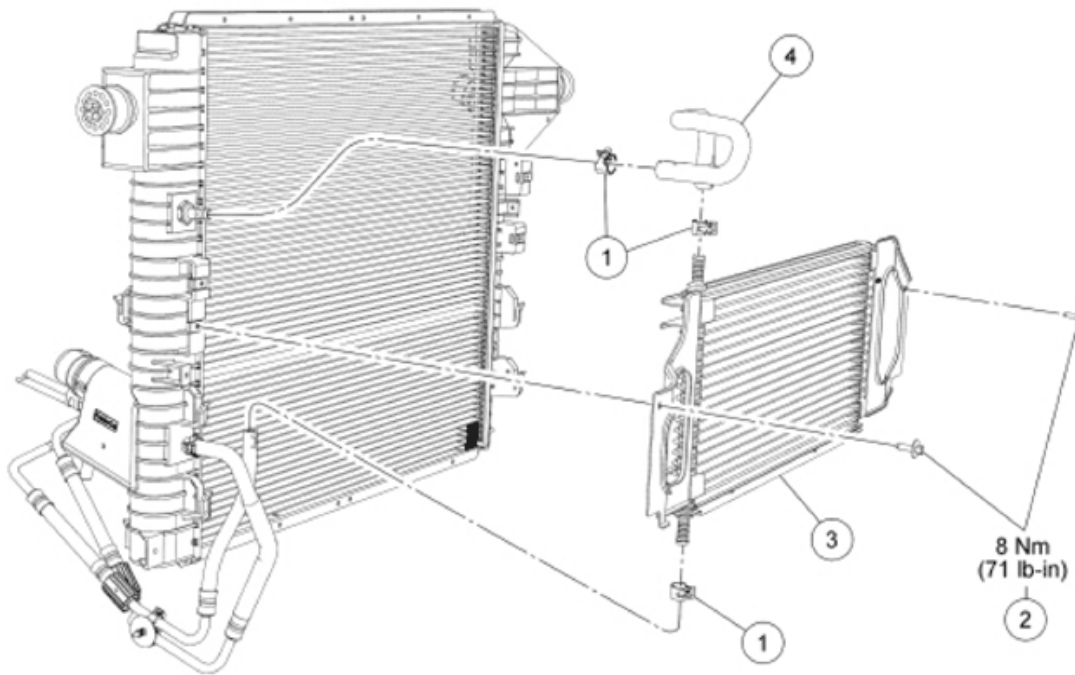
Identifying Auxiliary Transmission Fluid Cooler - Oil-To-Air Fluid Cooler With Torque Specifications (Gasoline Engine Vehicles)
